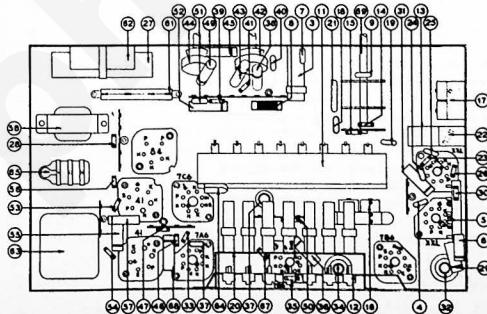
LOCATIONS OF PARTS AND TUBES UNDERSIDE OF CHASSIS — MODEL 41-255
